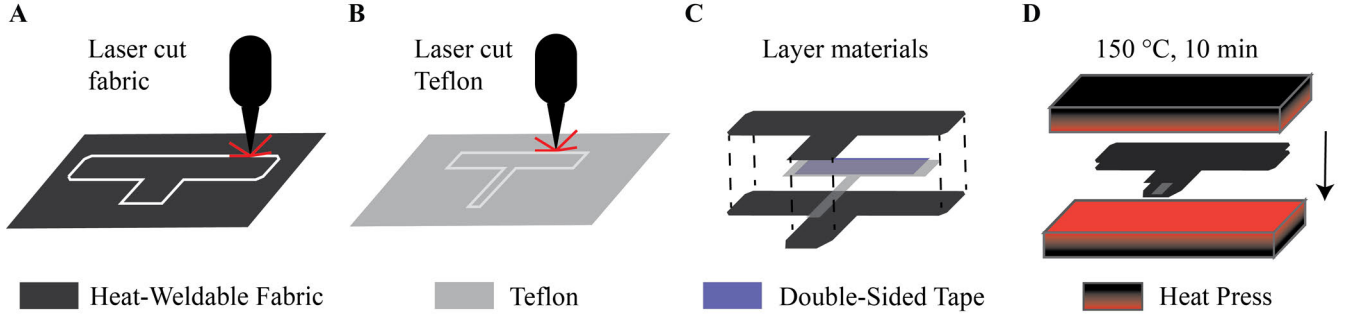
Soft robotic haptic feedback glove fabrication. A)-B) Heat weldable fabric and Teflon are laser cut into the desired pattern. C) Materials are layered and laminated using double sided tape. D) Materials are sealed using heat press to form the completed soft actuator.
